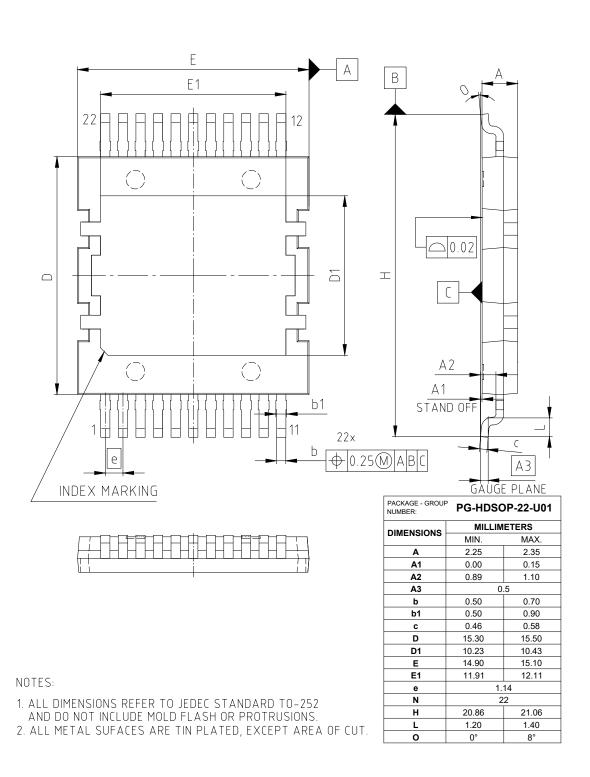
Outline PG-HDSOP-22, dimensions in mm
